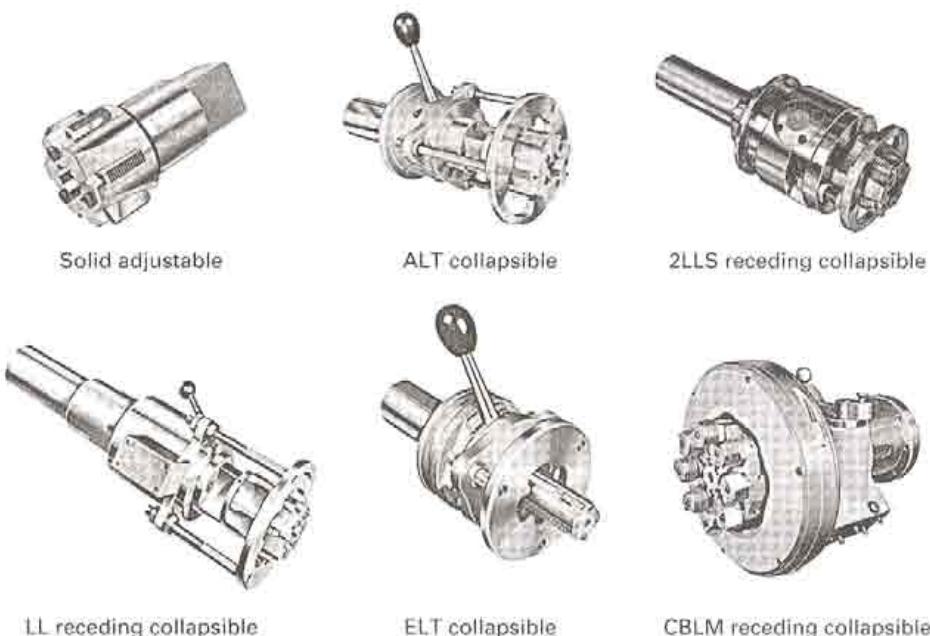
Solid-adjustable and collapsible taps. (Courtesy of Teledyne Landis Machine.)
